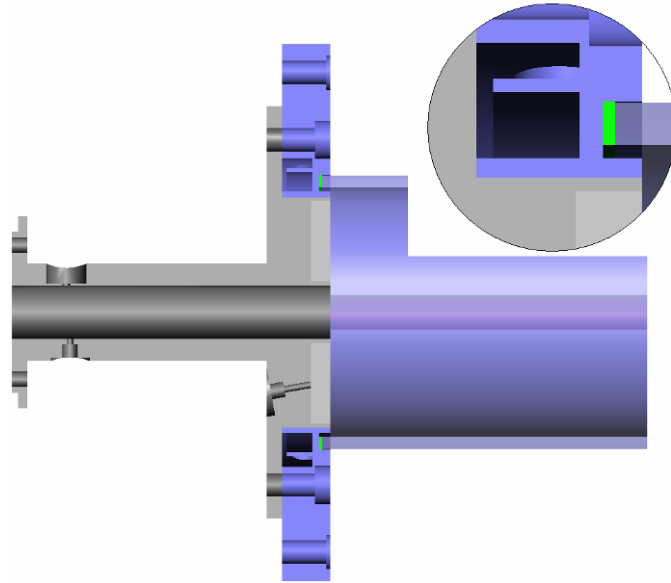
Image showing section view of the dilution air feature, pressure transducer and thermocouple mounting points and ceramic layer at the dump plane.
